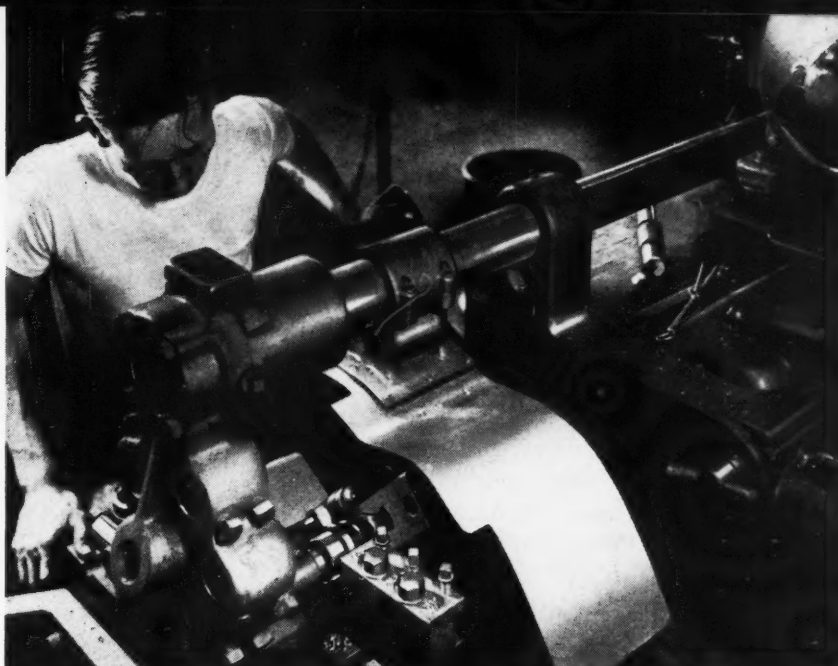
The tapered bearing seats on both ends of a pick-shaft are machined simultaneously on an engine lathe equipped with two independent cross-slides, one lead-screw, and, two taper attachments
